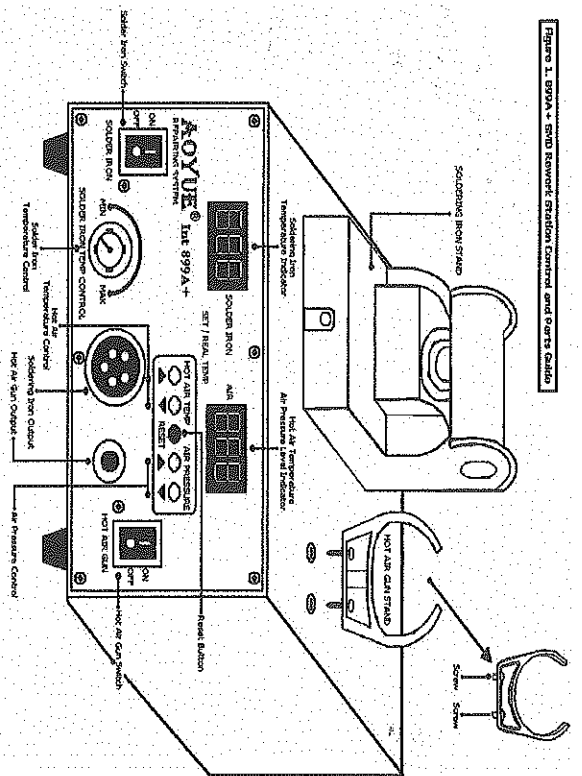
899A+ SMD Rework Station Control and Parts Guide
